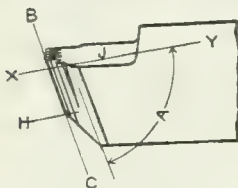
DIRECT FRONT END VIEW OF A DIE.
